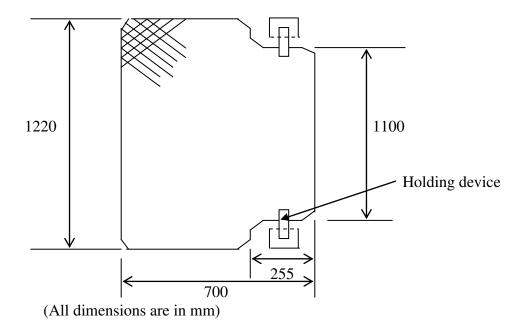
Sketch of foot plate drawing no. ICF/SK-2-5-066 alt. f, showing the overall dimensions. This foot plate has larger overall dimensions.
